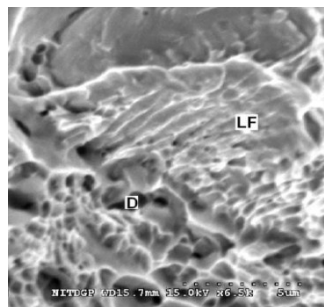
Fractured surfaces of the tensile tested specimens: (a) as-received
